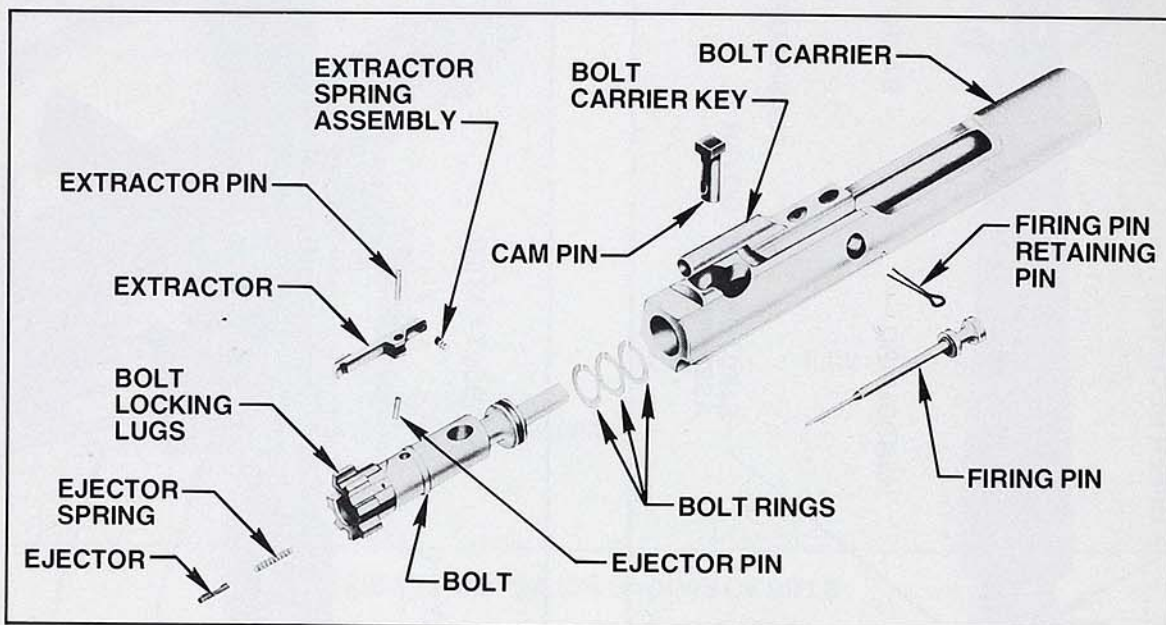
BOLT CARRIER ASSEMBLY.
